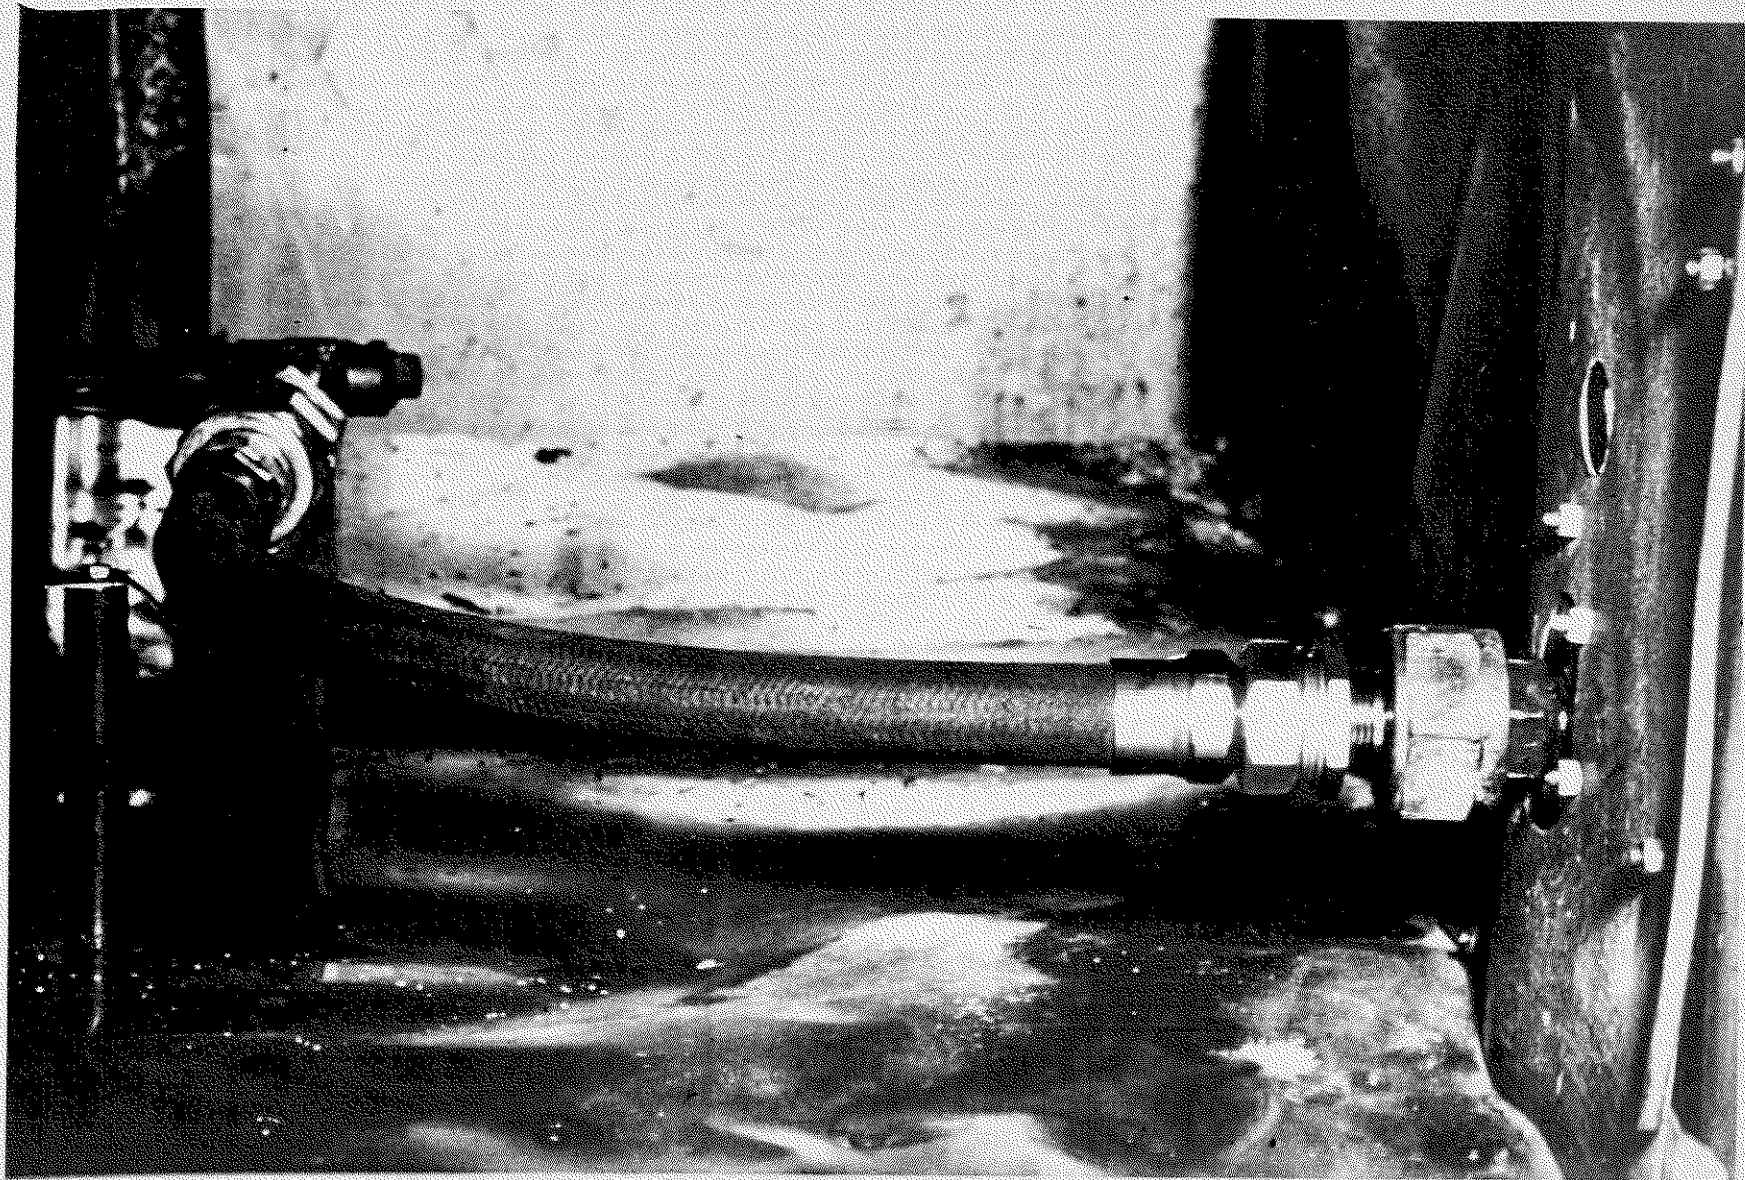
HOSE ASSEMBLY MADE UP WITH KLINCHER LOCKNUT
